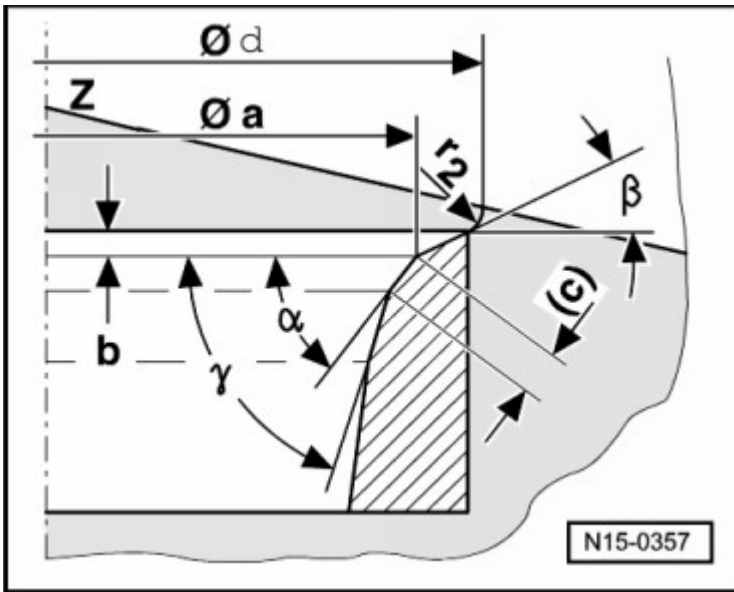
Identifying Angles And Dimensions To Rework Exhaust Valve Seat
